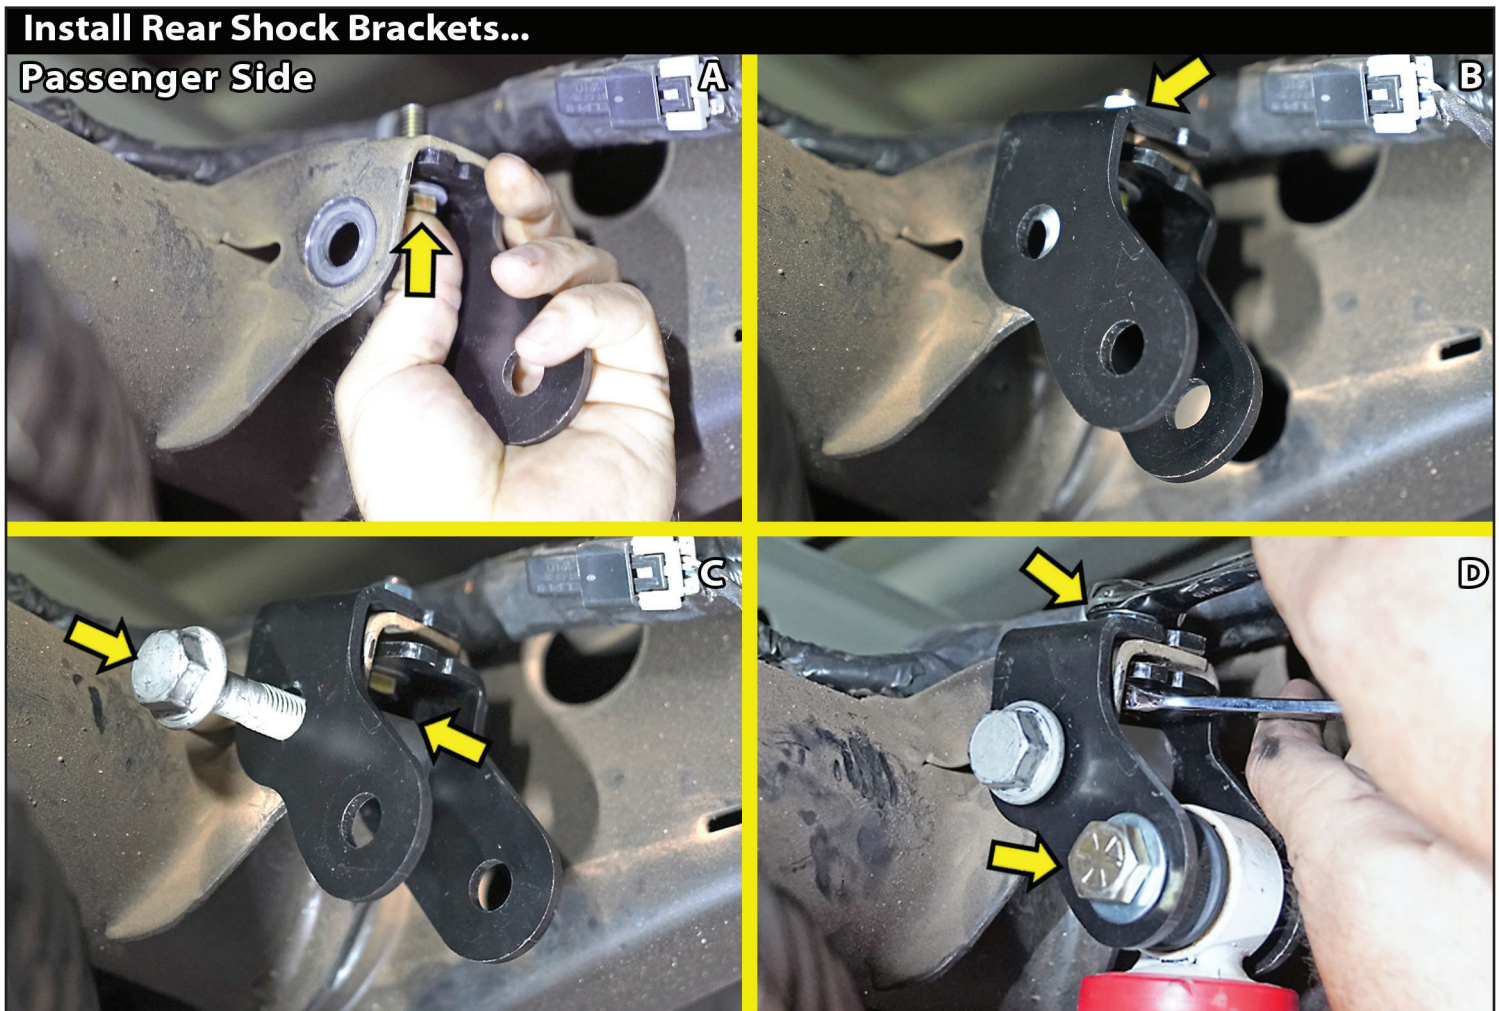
C Insert the factory shock bolt through the outer bracket into the factory shock mount. Insert the #14-3355 - Crush Sleeve in between the factory mount & inner bracket. Loosely secure. [21mm]
